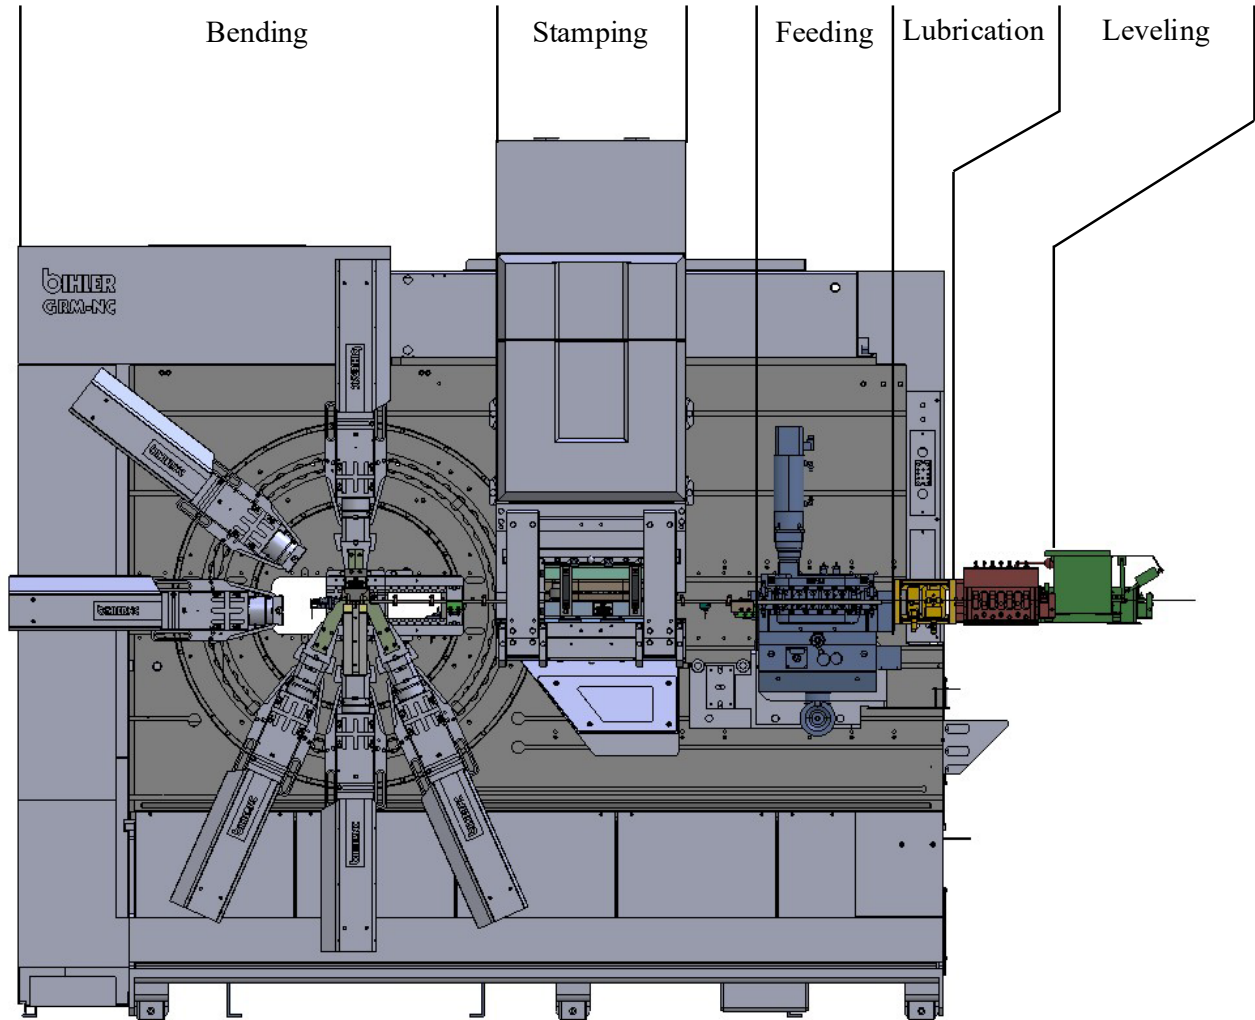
Manufacturing stations for busbar production on the Bihler GRM-NC stamping and bending machine.
